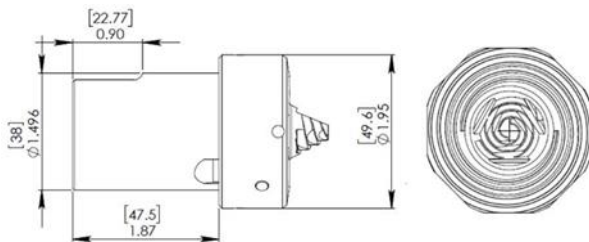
Drawing of the FSW tool utilized in the experiment. Compliments of MegaStir inc.
